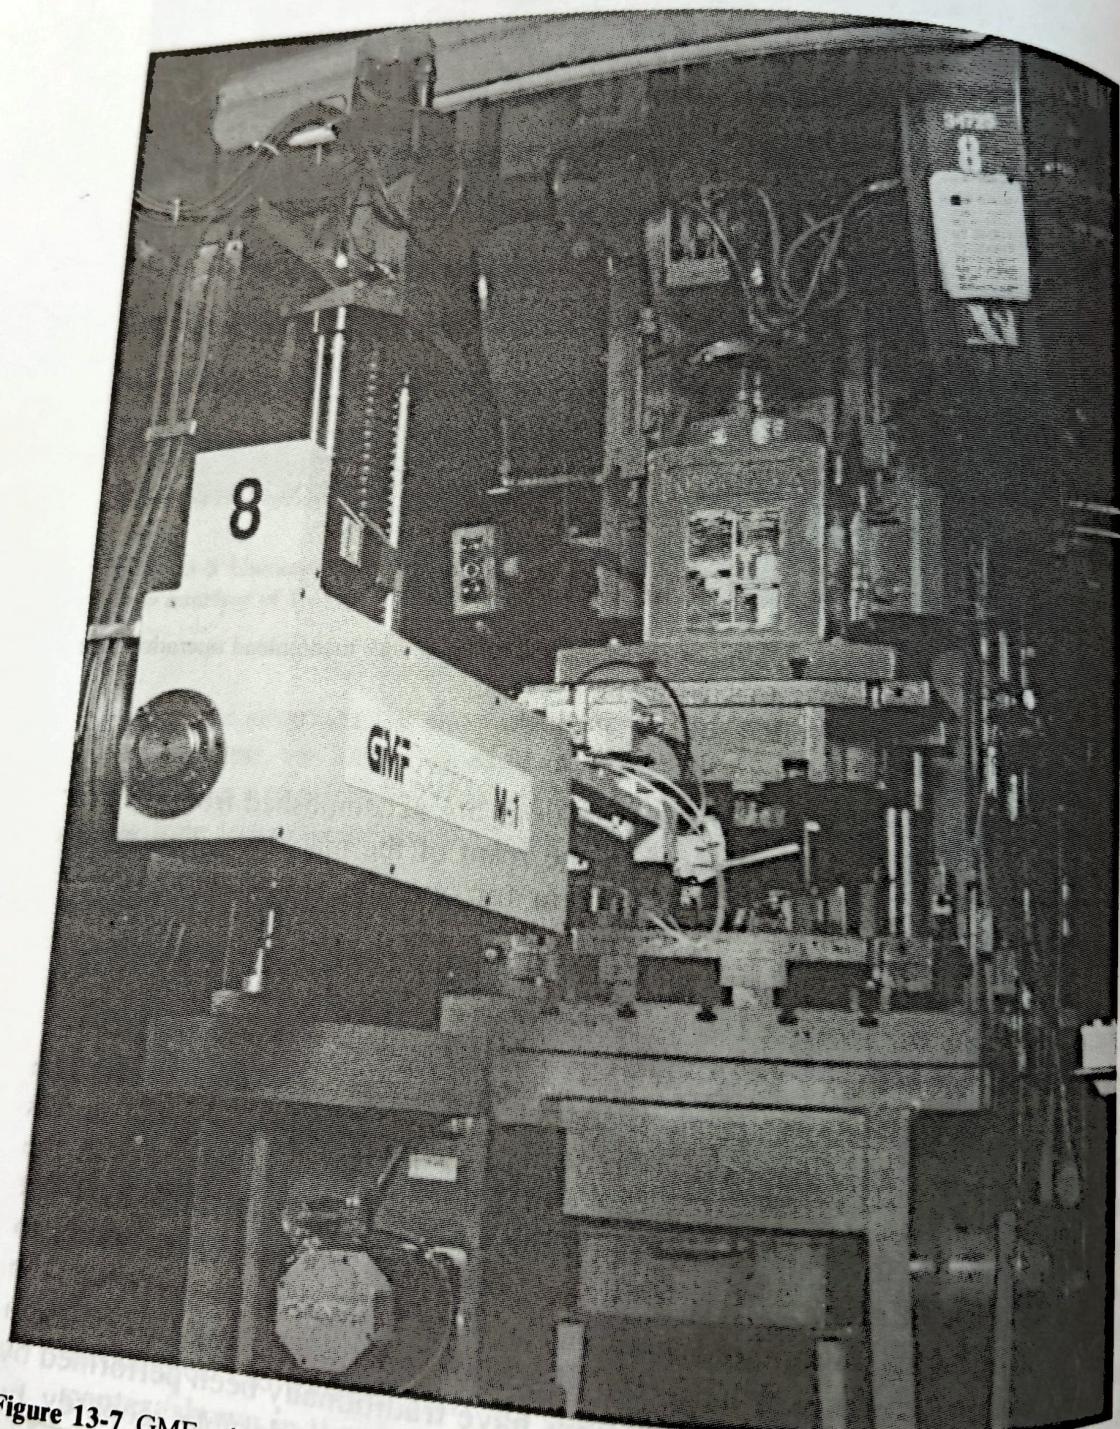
GMF robot performing machine loading/unloading task at a stamping press. (Photo courtesy of GMF Robotics)
